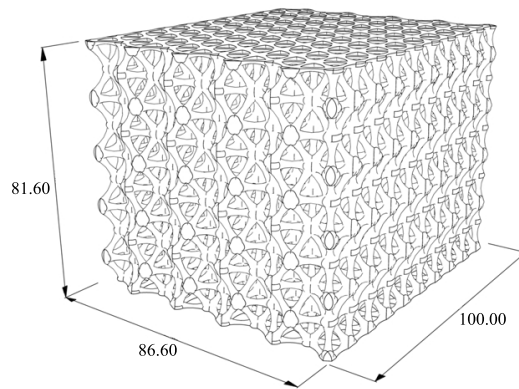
Lattice geometry containing small round cross sectional beam elements; Dimensions in [mm]
